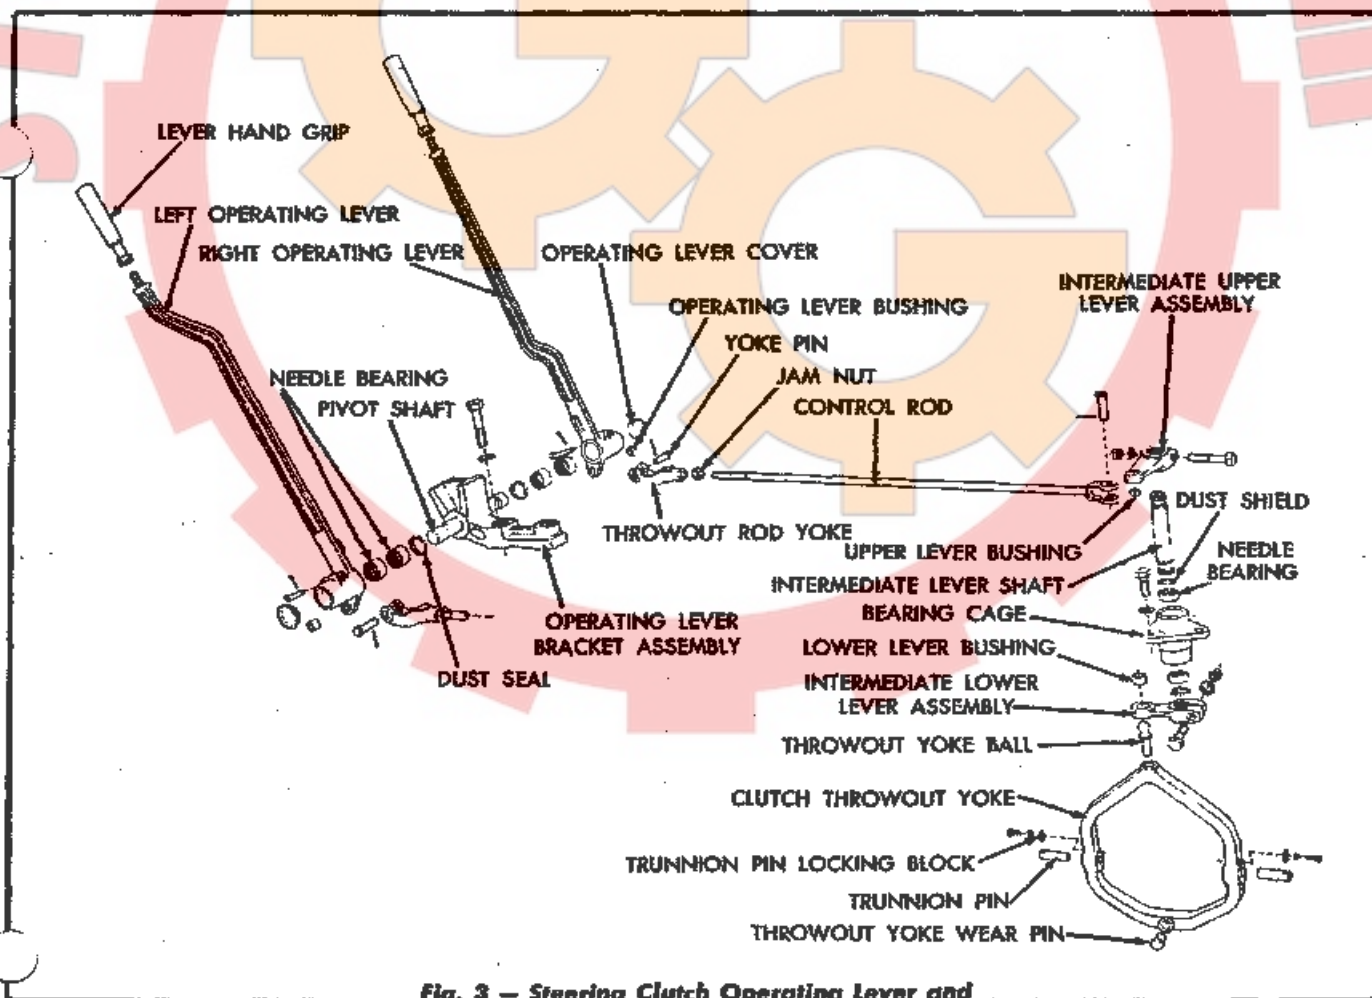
Steering Clutch Operating Lever and Linkage Details
